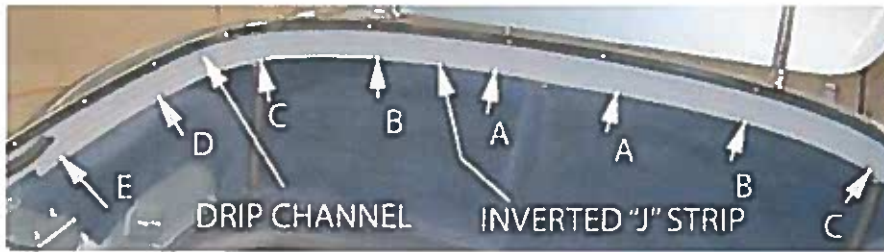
This photo of a BJB, before the rear cockpit was trimmed, shows how the inverted "J" strip is loosely positioned onto the front edge of the drip channel. To draw the side screw holes rearward to align them with the drip channel, tighten screws starting at the rear center and working outward towards the corners (C), ending with screws (D) and (E). This sequence needs to be followed on each iteration with the top clipped to the rear edge of the "J". You will need to remove some of the multiple layers of material at the two seams next to the rear window where they wrap around the "J" strip. Extra material thickness at these locations will keep the strip from properly nesting against the drip channel and push the strip's ends forward, making hole alignment at (D) and (E) almost impossible. While clearance is a bit tight on the sides with the cockpit trimmed, there is access for tightening all screws. Grease the screws and make sure they run in freely so you don't damage the tapped threads. They only need to be made snug – don't over-tighten them.
